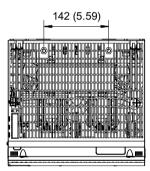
Dimension drawing of the SF Choke Module 120 kW, all dimensions in mm and (inches)
